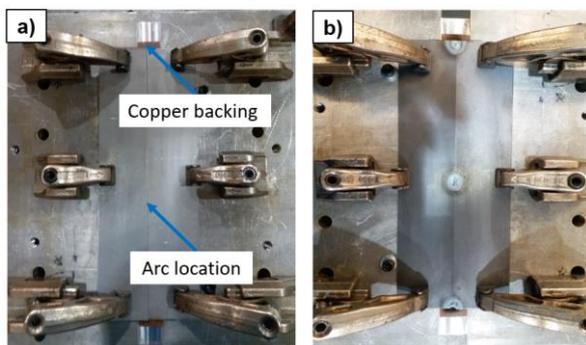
Substrate in a) Clamped condition b) Tack welded condition
